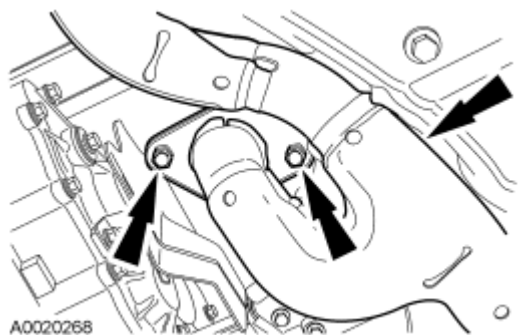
Rear Exhaust Pipe Flange & Nuts
